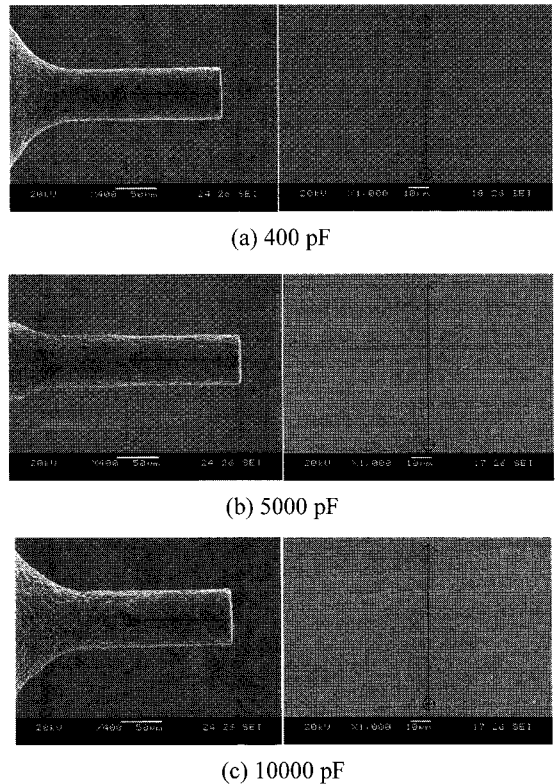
Micro tools machined with different capacitors and machining surfaces of glass
